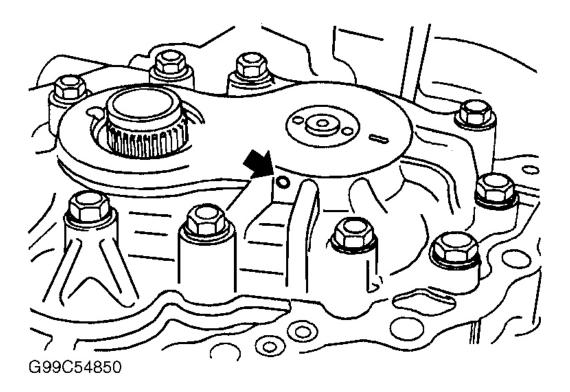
Location Of Bearing Housing Roll Pin Courtesy of FORD MOTOR CO.
